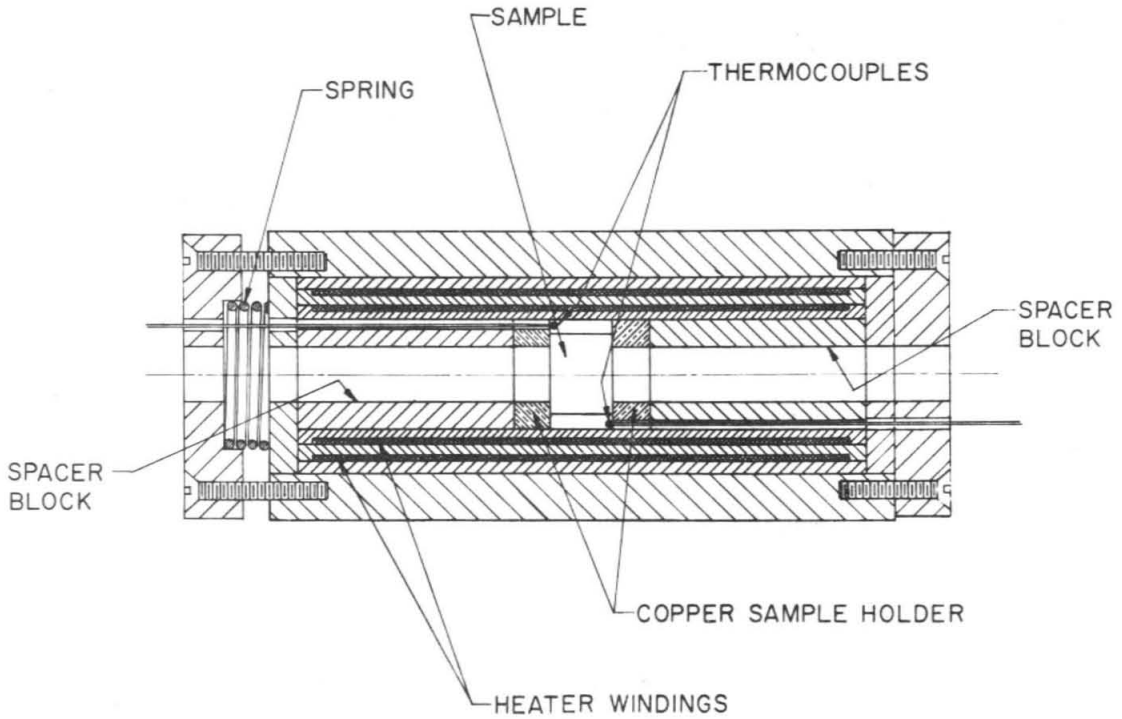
Furnace cross-section through thermocouples with sample in place.
